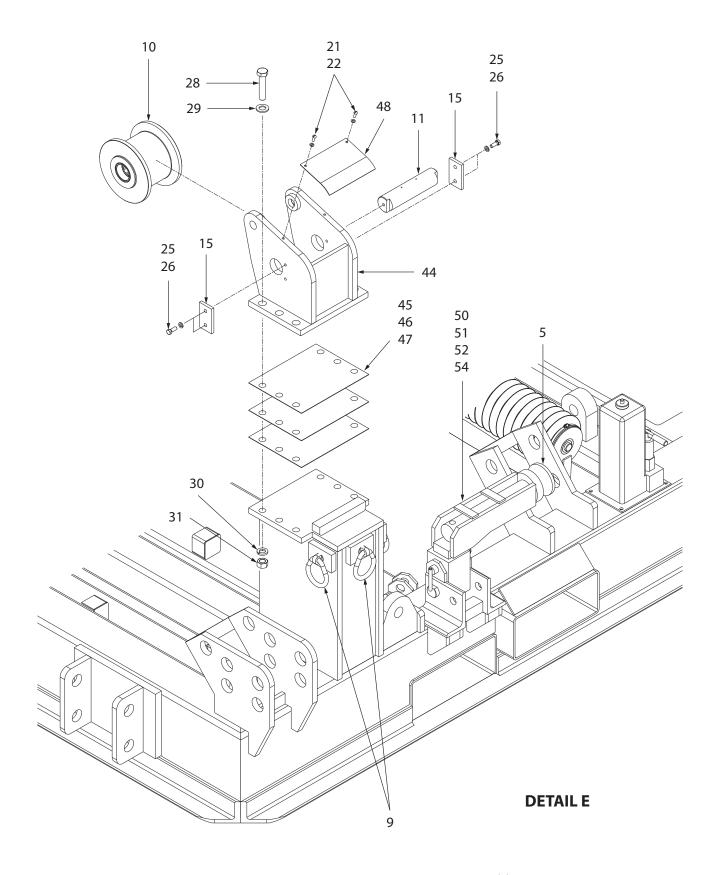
AGSE-E18401-S01 Base Assembly
